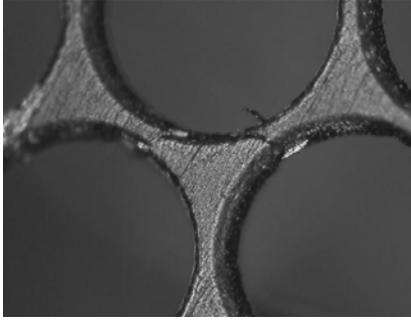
Photograph of Screen Grid Broken Webbings Identified in Pre-Test Inspection.
